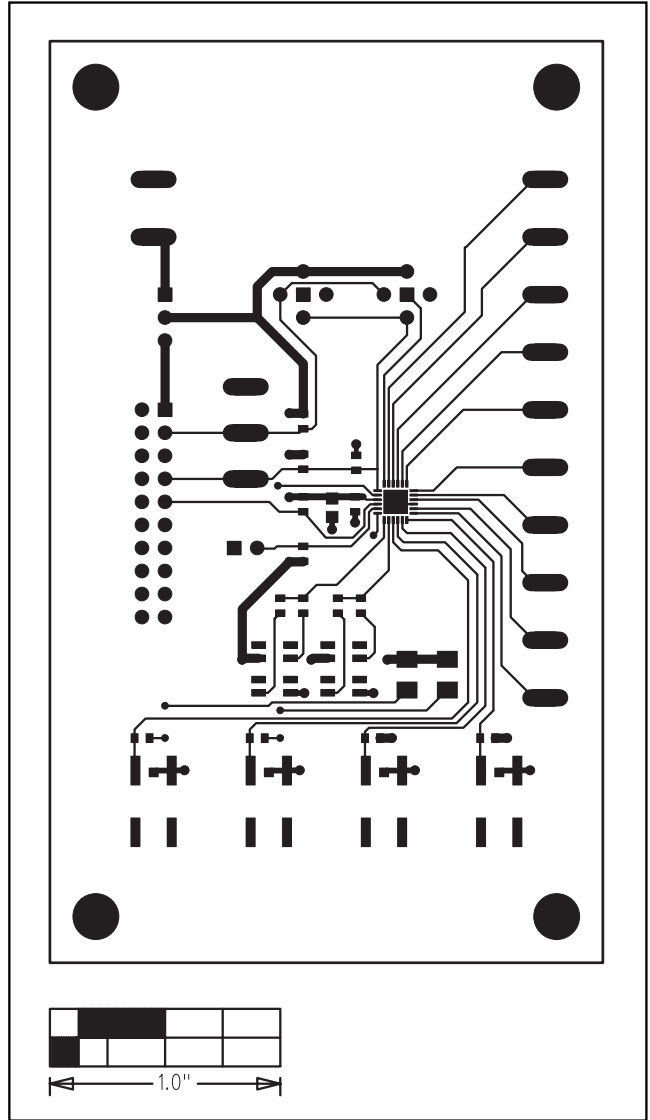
MAX7327 EV Kit PCB Layout—Component Side
